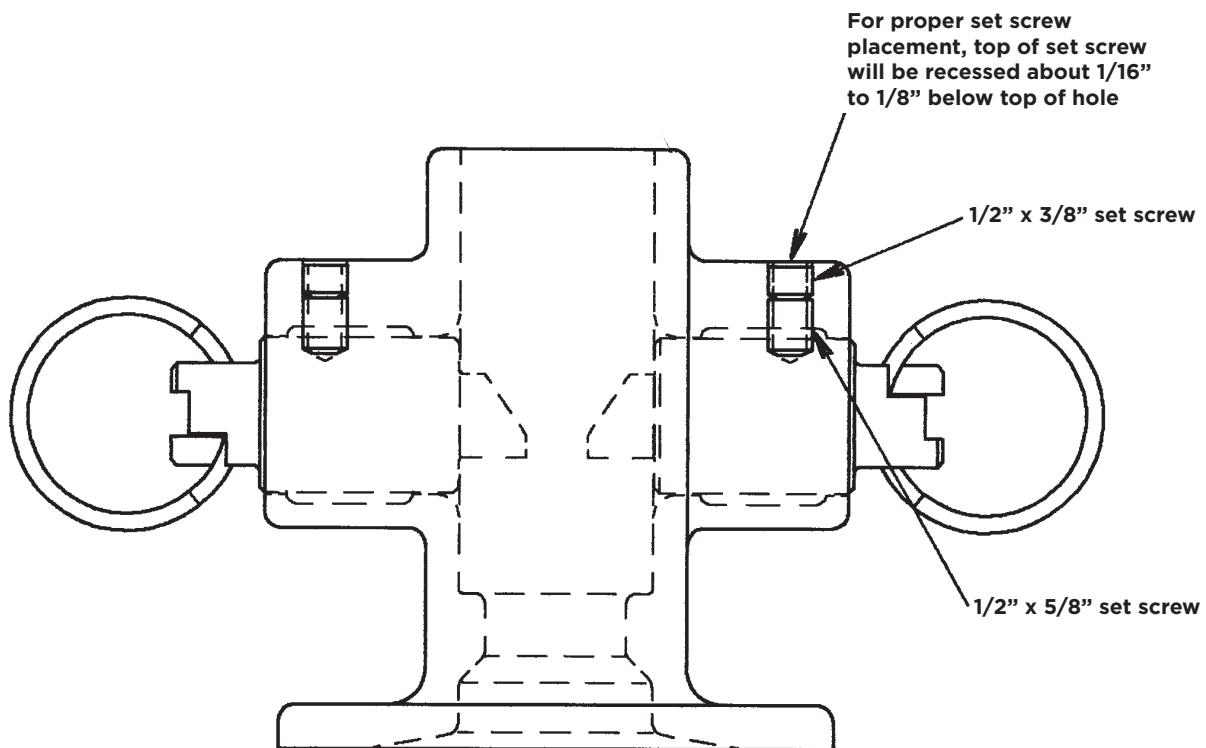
Locking Dog Assembly With Proper Set Screw Installation
